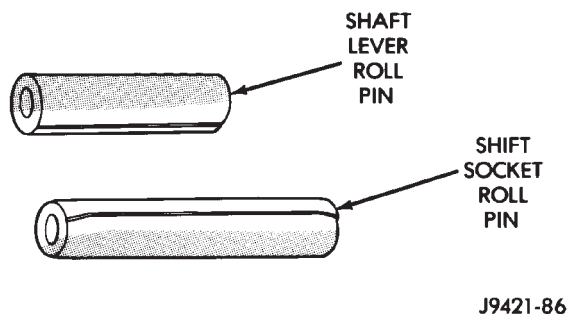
Roll Pin Identification—Shaft Lever And Shift Socket
